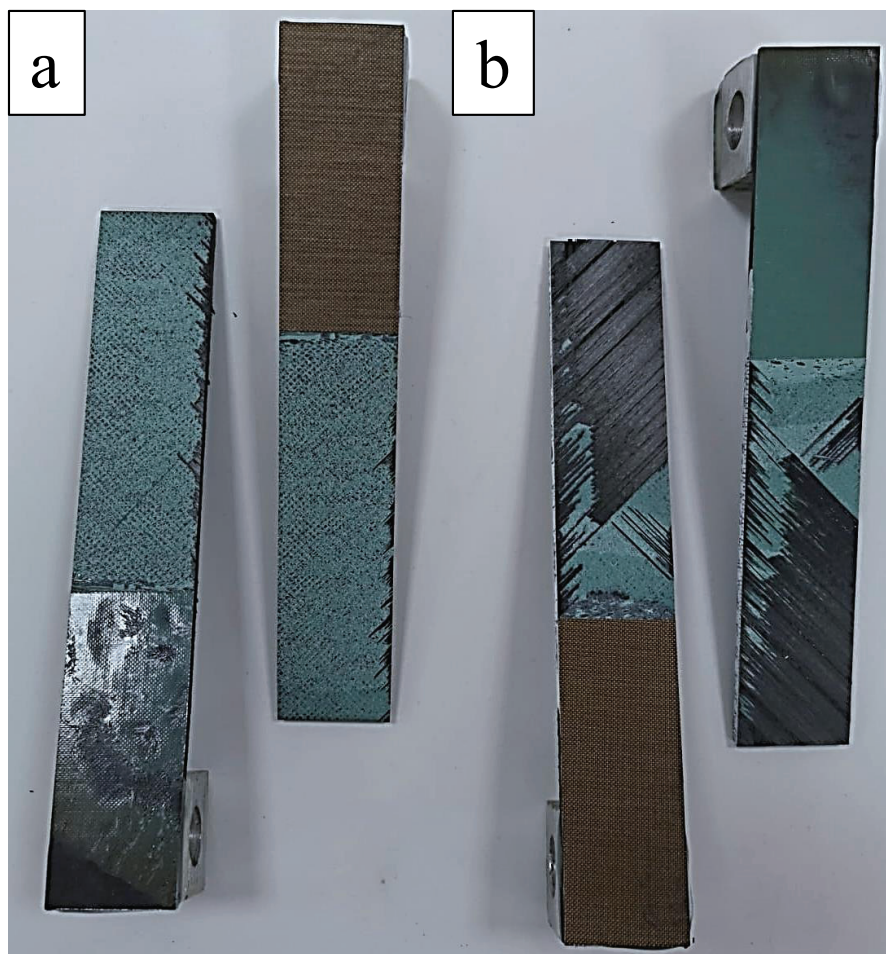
31. Photograph of fractured surfaces of DCB specimens after aging a) reference sample and b) sample B (laser treatment with 0.20 mm laser offset distance).
